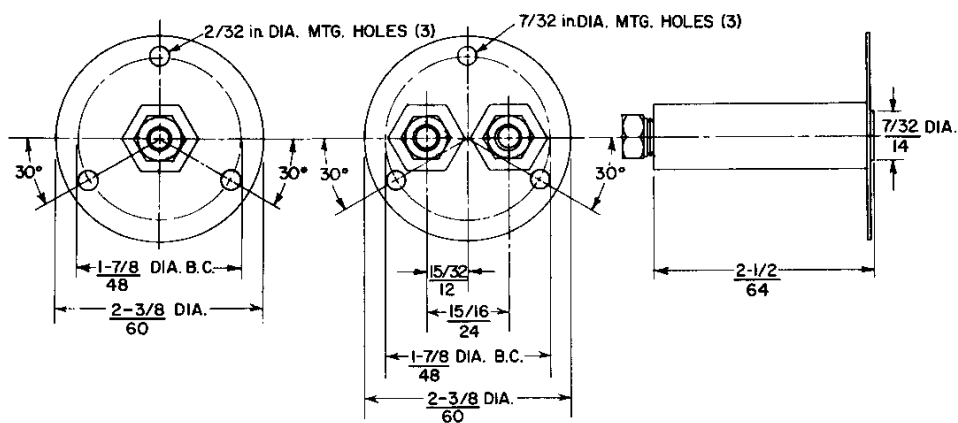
T-800-1603 (Single Hub) & T-800-1604 (Double Hub) Duct Flange
